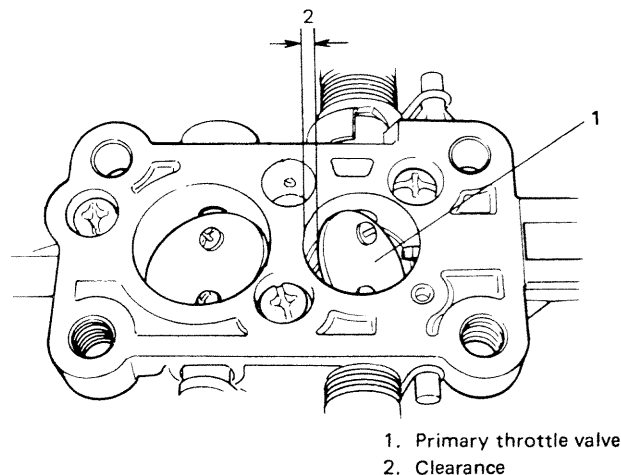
Clearance between throttle valve and carburetor bore
